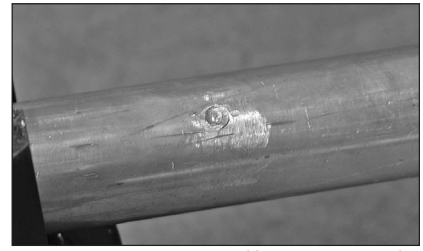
Peen edge of filler hole over top surface of plug.
